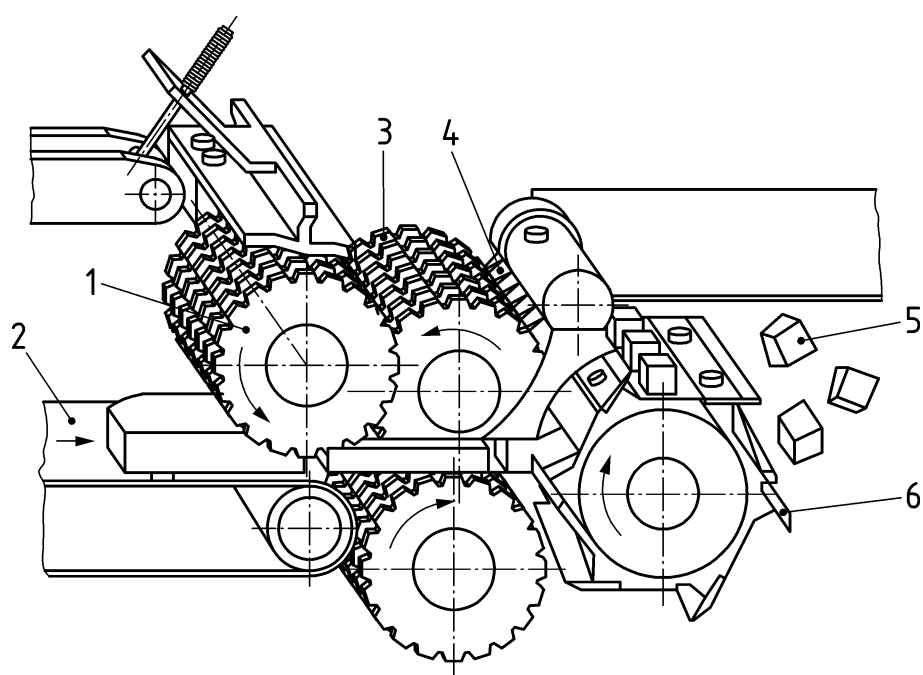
Cubes cutting machine type with various blades, conveying unit and feed conveyor
